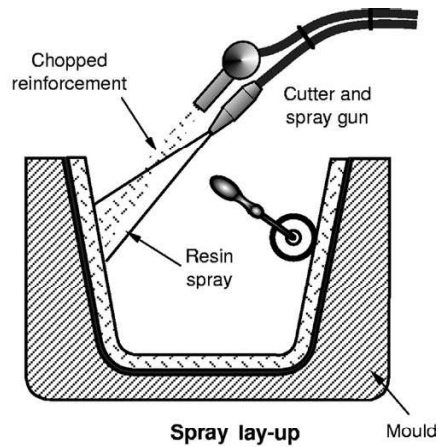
Spray layup technique for manufacturing composites (Swift and Booker, 2013).
